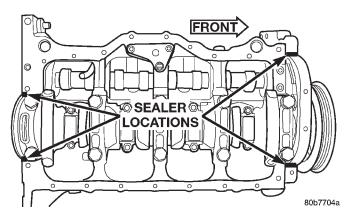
Location of Mopar® Silicone Adhesive Sealant on Cylinder Block
